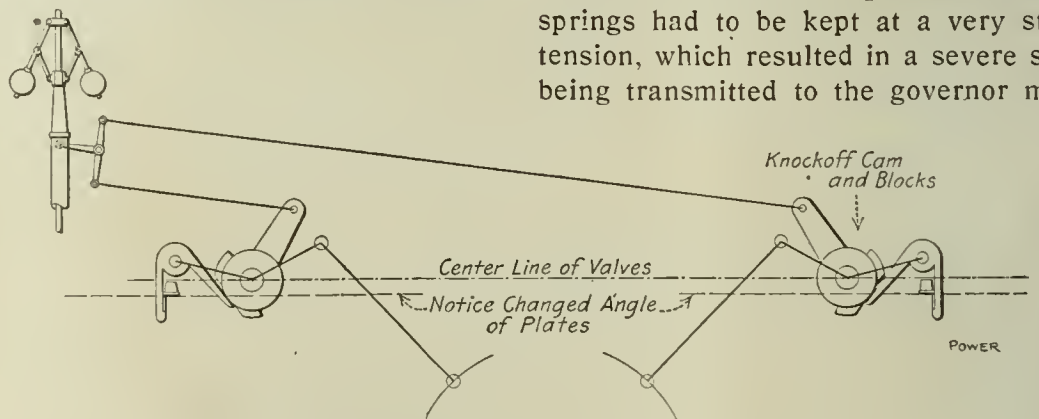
CORRECTED ARRANGEMENT OF VALVE GEAR
